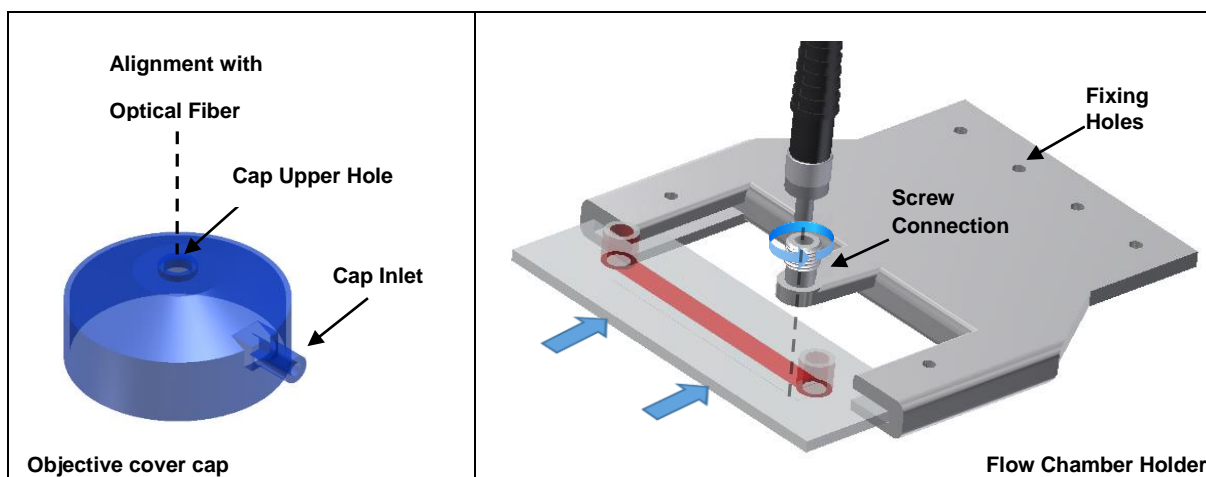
Objective cover cap (left) and flow chamber holder (right). Both parts were CAD-designed and manufactured by an in-house 3D printer.
